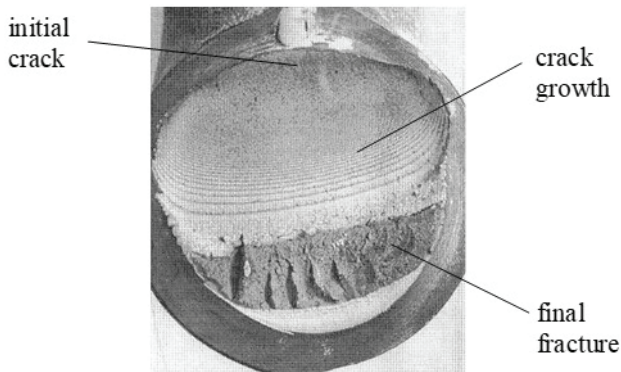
Fatigue fracture surface from a shaft in bending [1.5]
